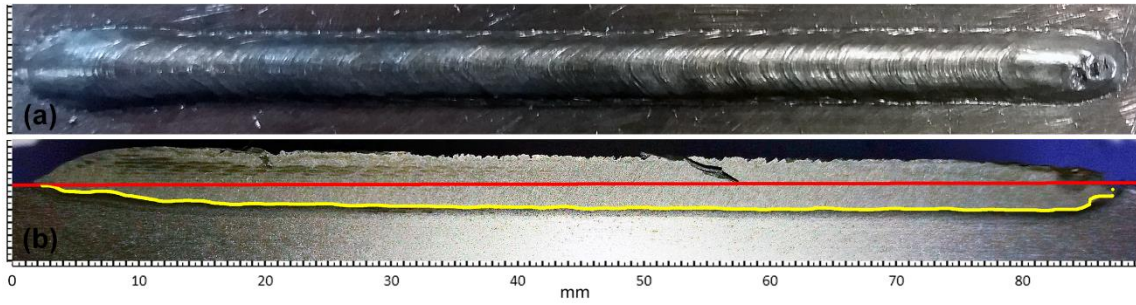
Weld bead obtained in the experiment 3: (a) Top view of the weld bead; (b) Weld bead depth profile (yellow line) and surface of the workpiece (red line) obtained by the macrographic analyses algorithm.
